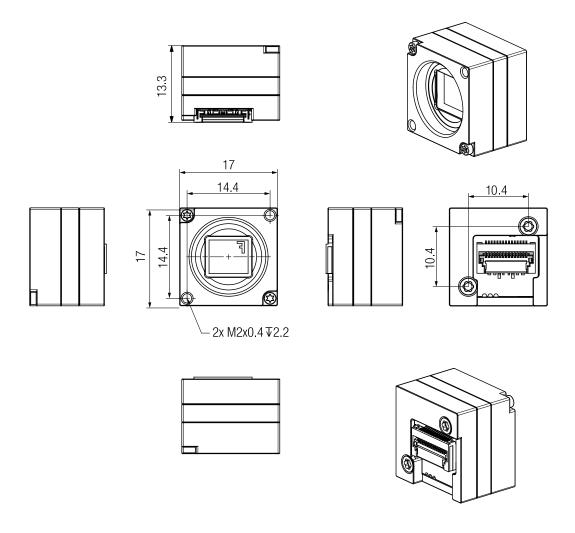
Dimensional drawing of MU051xG-SY with ADPT-MU-17x17-CX3-FL adapter
